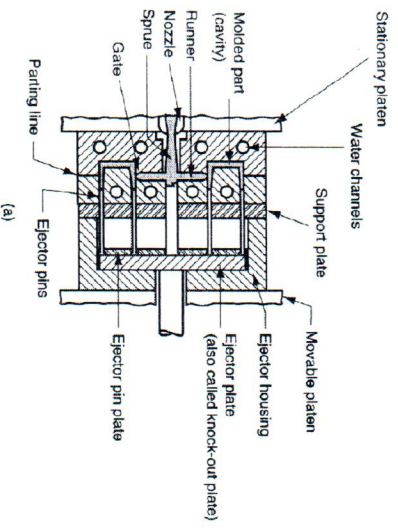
Details of a two-plate mold for thermoplastic injection molding: (a) closed. Mold has two cavities to produce two cup-shaped parts with each injection shot.
